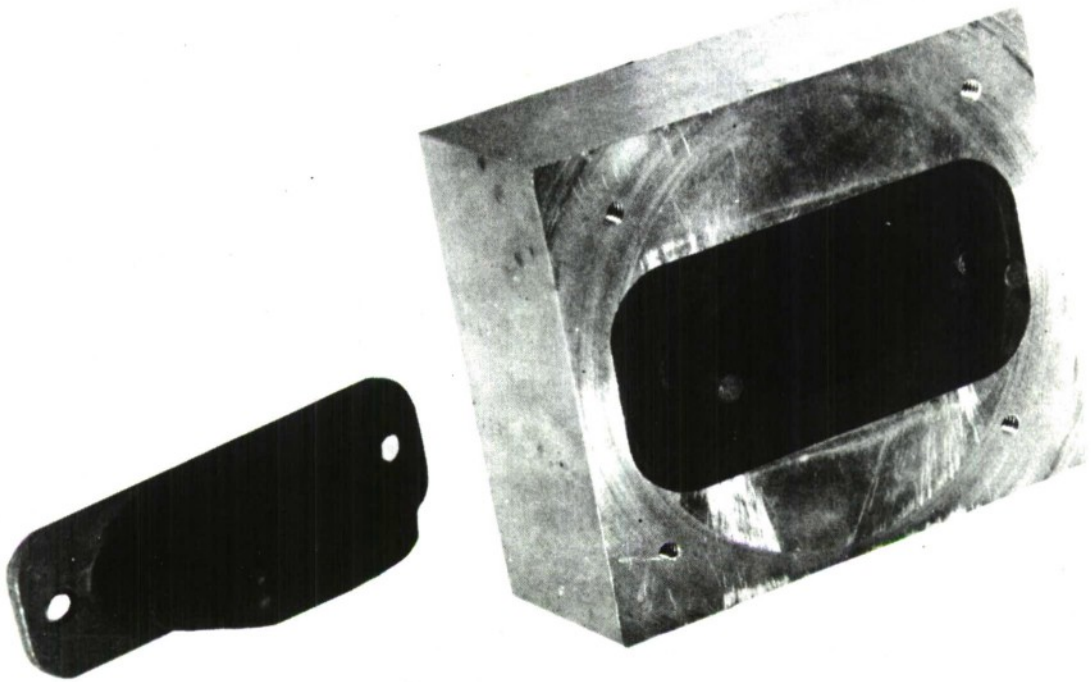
U. S. Gypsum Company S-408 Hy-Temp Surface Coat-Casting Resin epoxy mold and compression molded rubber component for the M47 Tank Shell Rack Spacer, PN B8742773.
